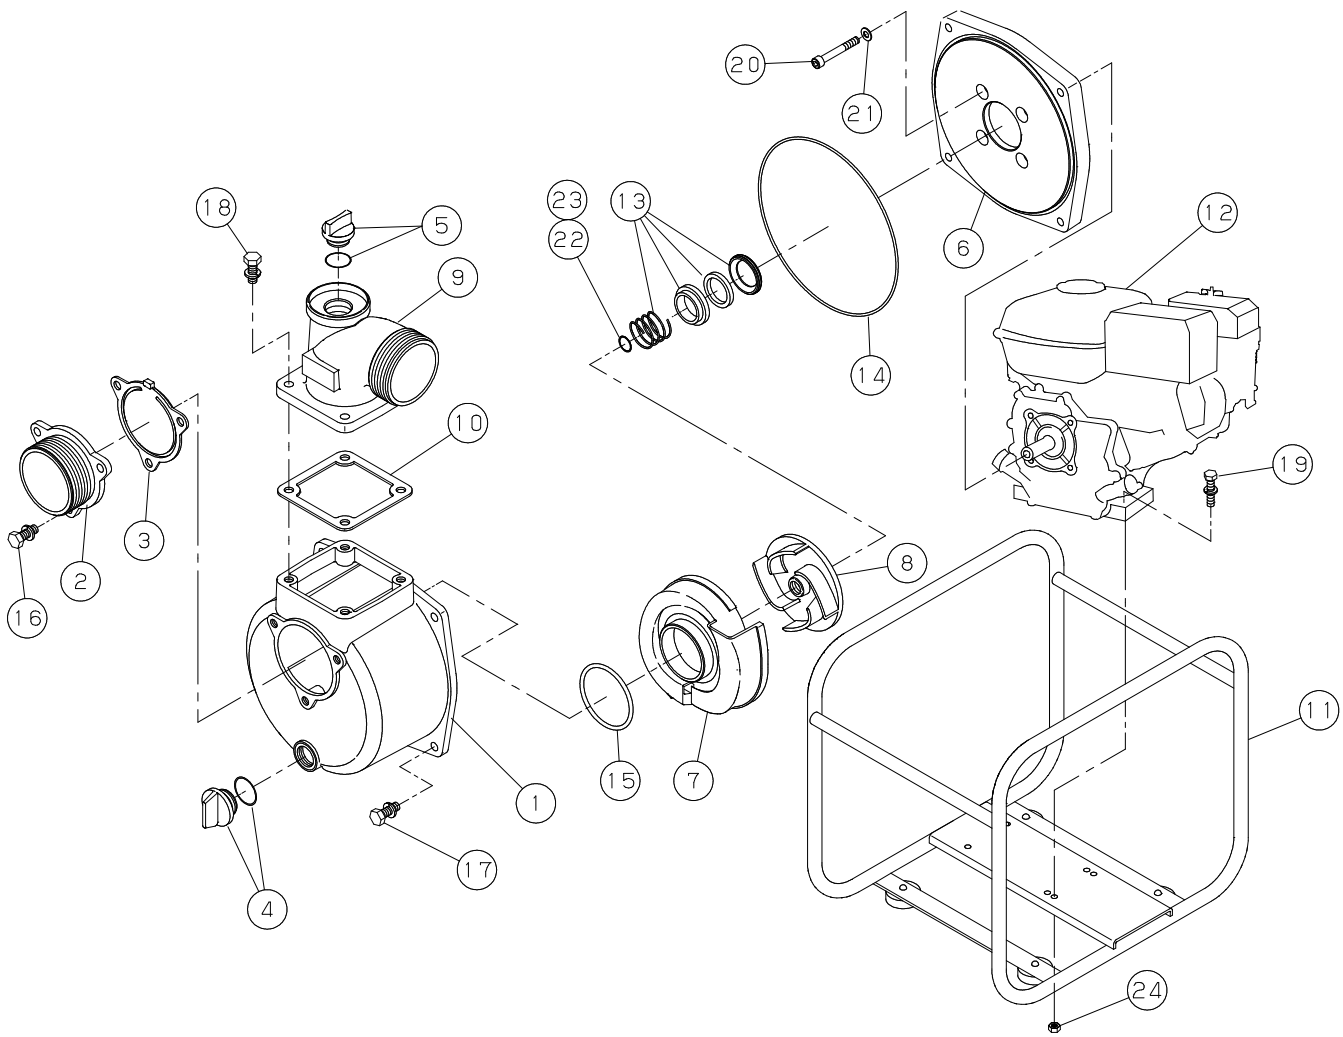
Repair Parts Illustration for Engine Driven Pumps
